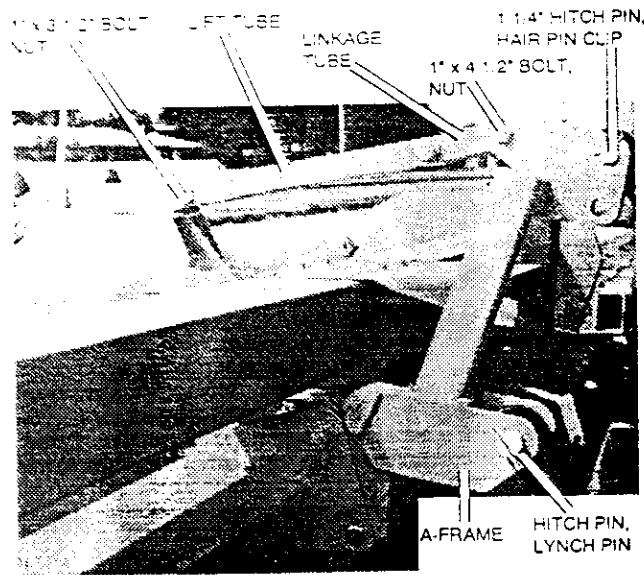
Hitch Assembly of Mounted (three-point) Unit.
